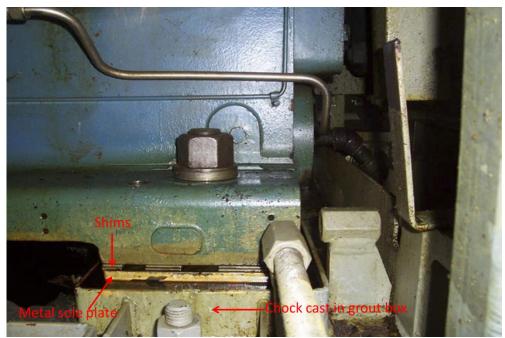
Foot is anchored to skid and supported by shims on chock, which is set in grout box. Jacking screws for horizontal adjustment can be seen [6]
